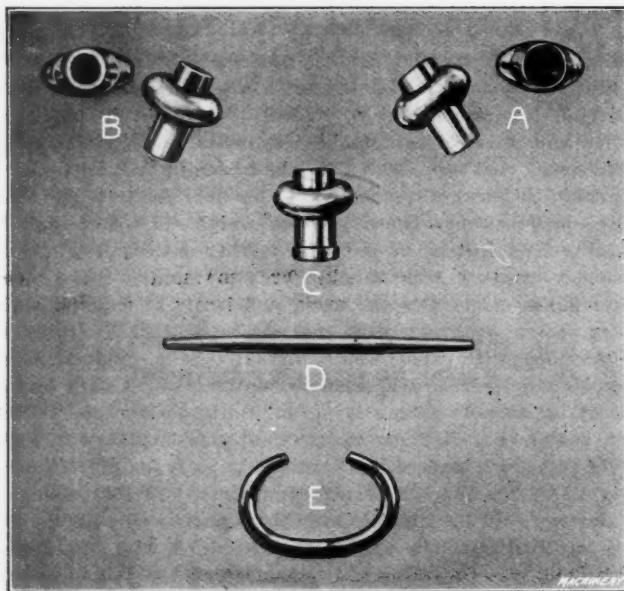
Samples of Watch Pendants, a Bow Blank and Bow
